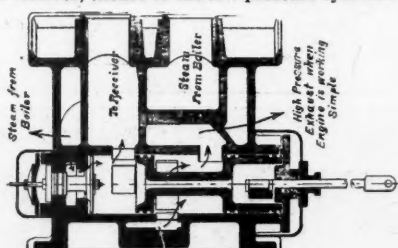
Figs. A and B show the general construction of the starting gear and intercepting valve of the Pittsburgh compound locomotives. This gear is generally placed on the cylinder saddle, and is so arranged that the engineer by moving the lever in the cab can open an independent exhaust for the high-pressure cylinder through the passage fig. A, to the stack. When it is desired to run com-
